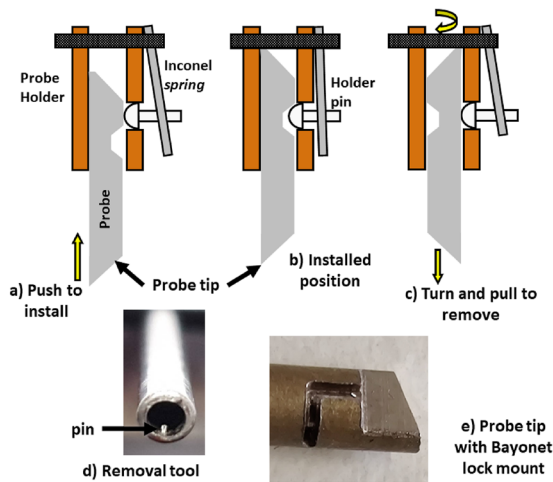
Design of the probe-holder, probe tip, and the removal tool is shown. (a)–(c) Description of the procedure to install a probe in the probe-holder and remove the probe from the probe-holder. (d) The removal tool with a pin to go in the bayonet lock mount on the probe tip shown in (e).
